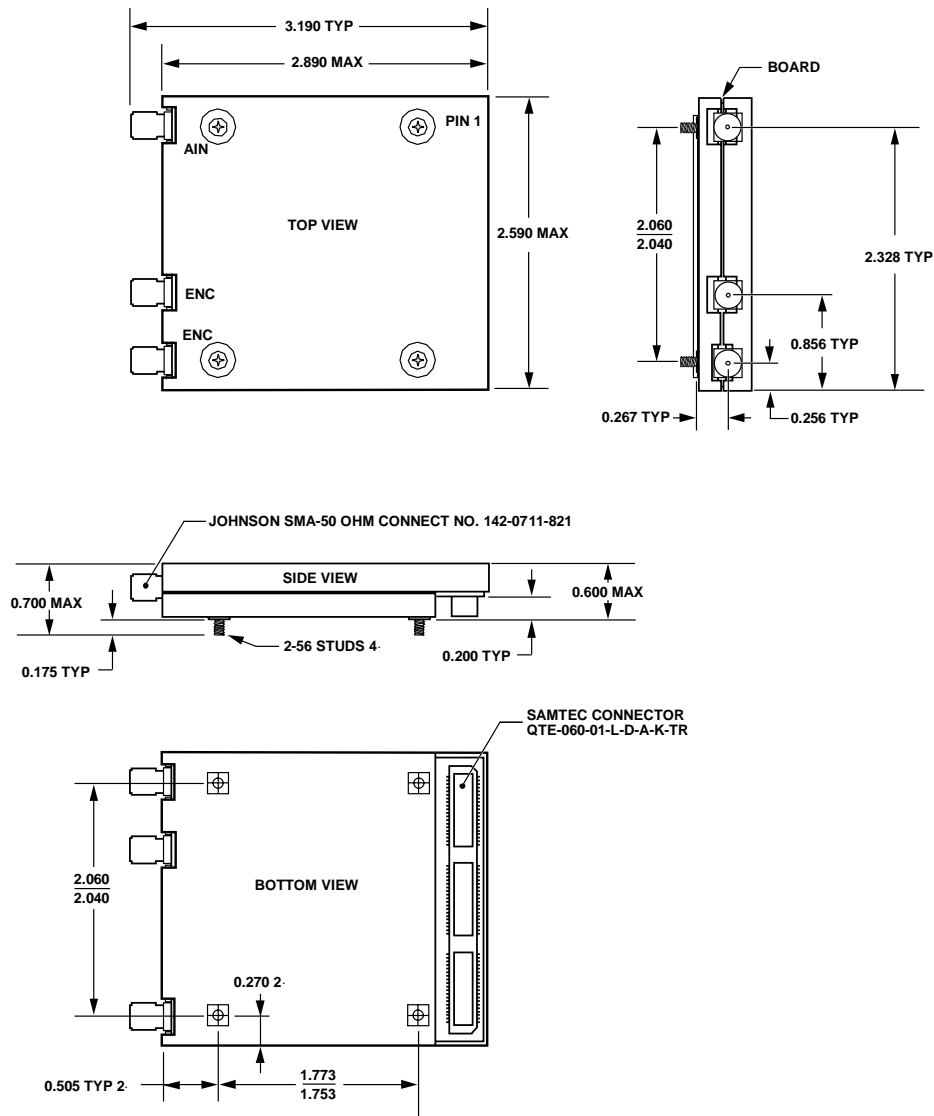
Non-Hermetic Hybrid—Surface-Mounted Parts
